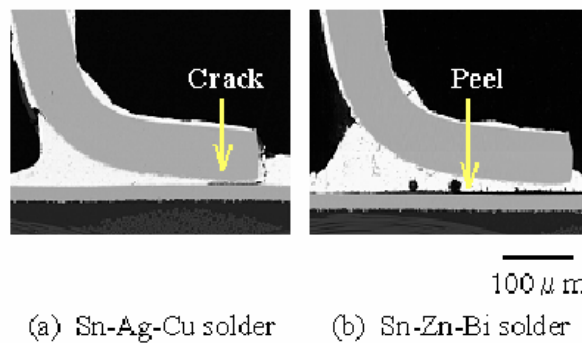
Cross-sectional BE Image of QFP Solder Joints with Sn-10Pb-plated Lead after Thermal Cycle Test
